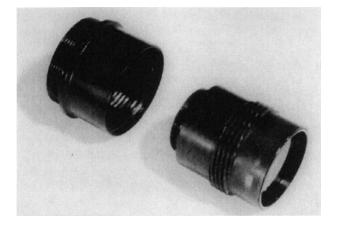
Mating threaded parts for a multiple lead thread on an eyepiece. The six parallel grooves are spaced at 0.0625-in. (1.578-mm) intervals so are equivalent to 16 tpi (0.630 tpmm).
